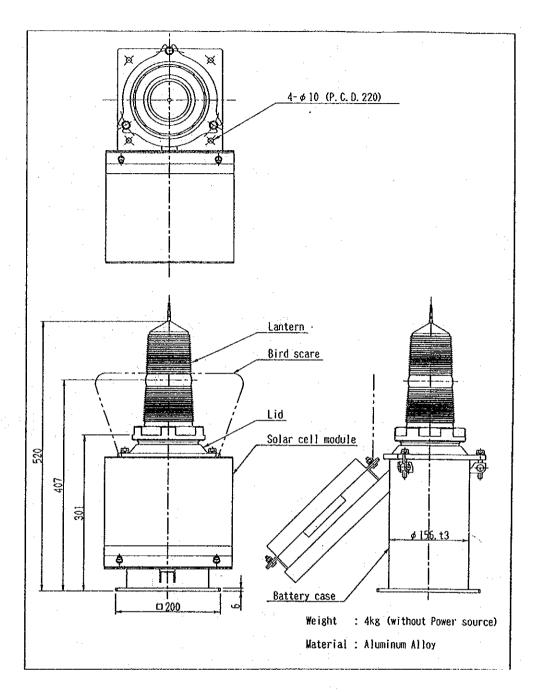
Marking Lights on Submerged Walls
